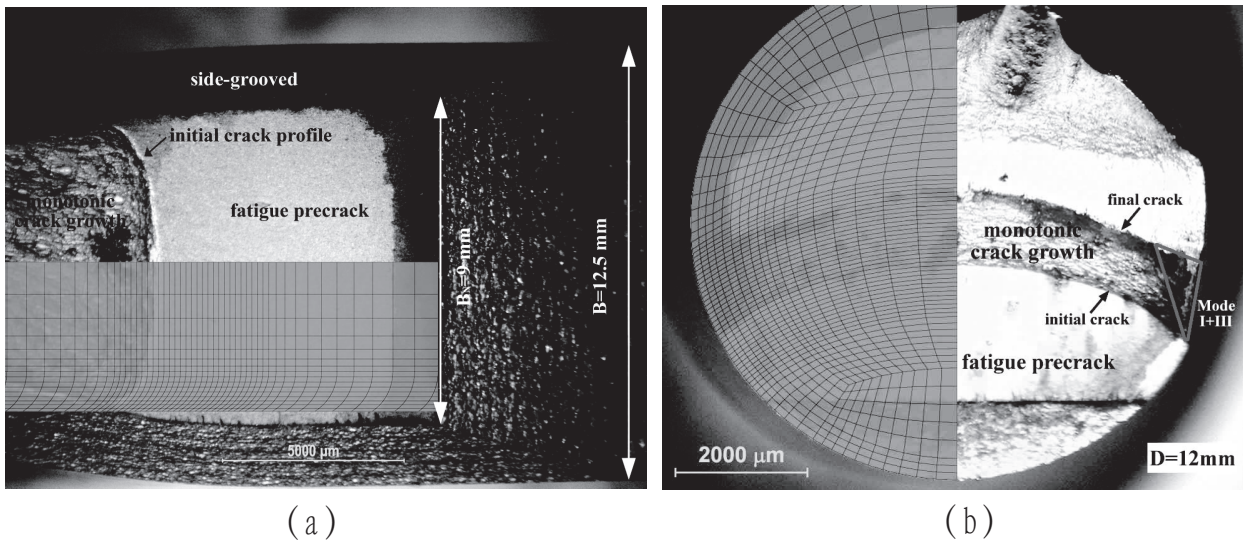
The fracture surfaces of both cracked specimens. (a) C(T) specimen; (b) cracked rod bar.
